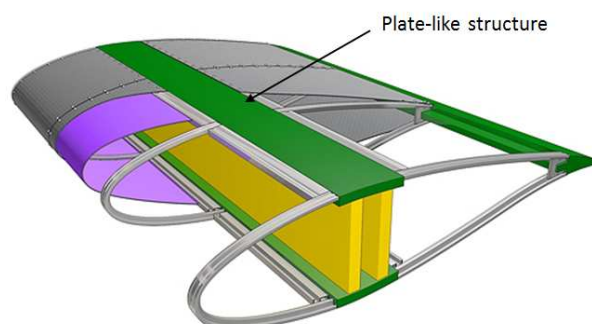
A cross section of a GFRP blade. The blade stretched over a composite frame (light grey) and central spar (yellow and green) (Petersen & Davis 2011)
